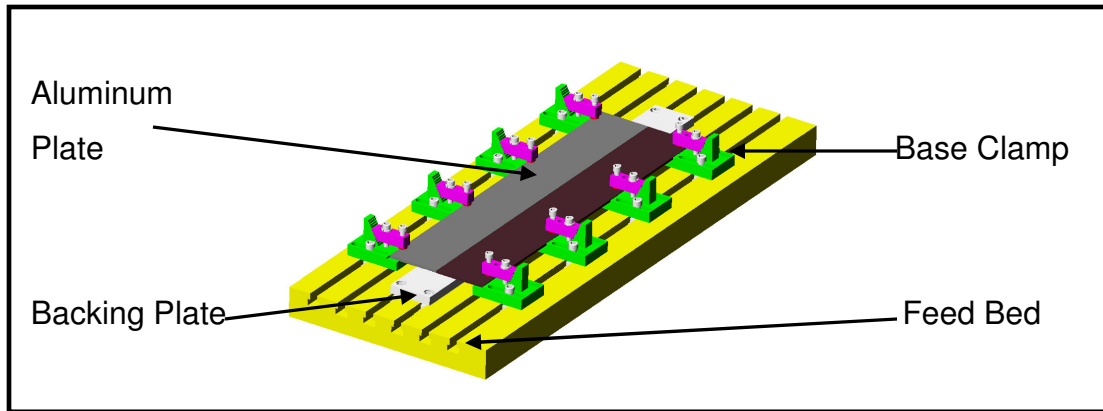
The clamping arrangement for FSW process [Blignault, 2002].
